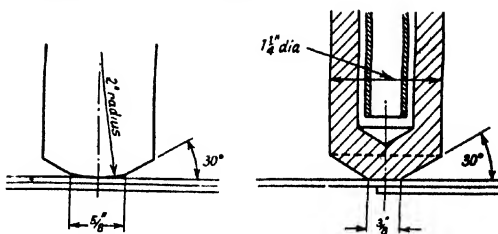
ELECTRODE FOR "MASH" STITCH WELDING
